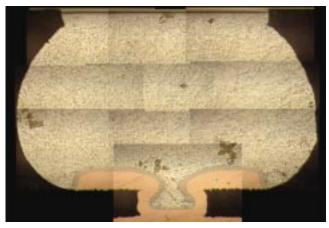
Micrograph of a Cross-Section of a BGA SnAgCu Solder Ball, Assembled onto a Board with SnPb Solder Paste using a Backward Compatibility Reflows Soldering Profile. The SnAgCu Solder Ball has Melted.
